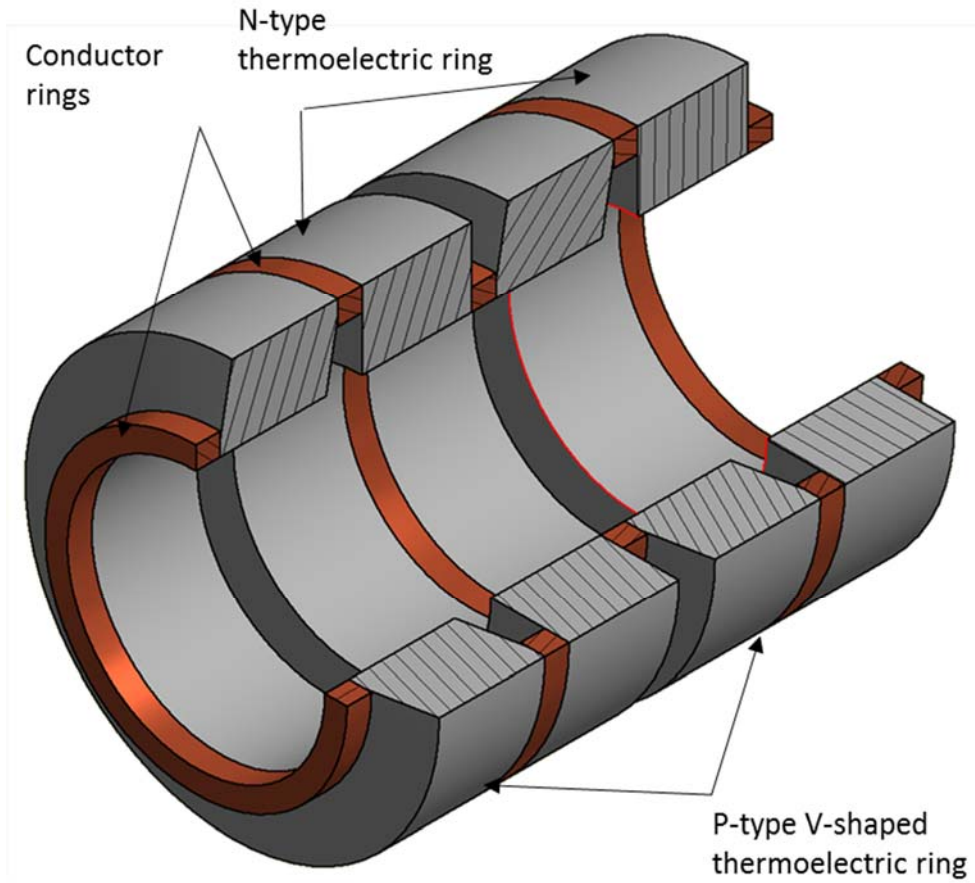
TEG test section assembly using V-shaped P-type Rings
